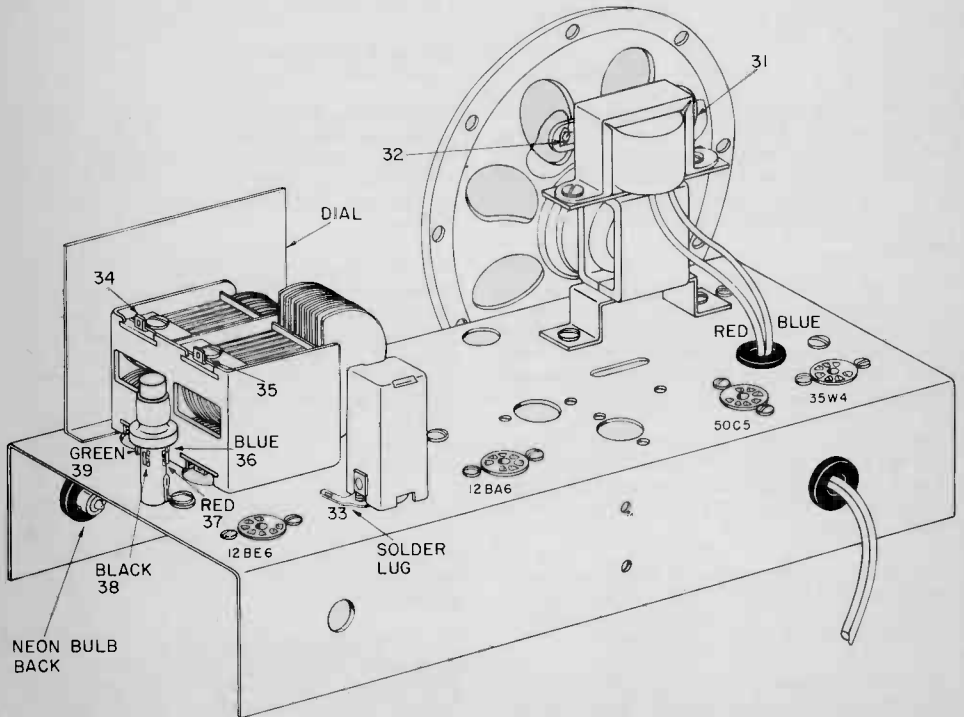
Speaker and output transformer mounting. (Some parts shown are not used in baby minder.)
